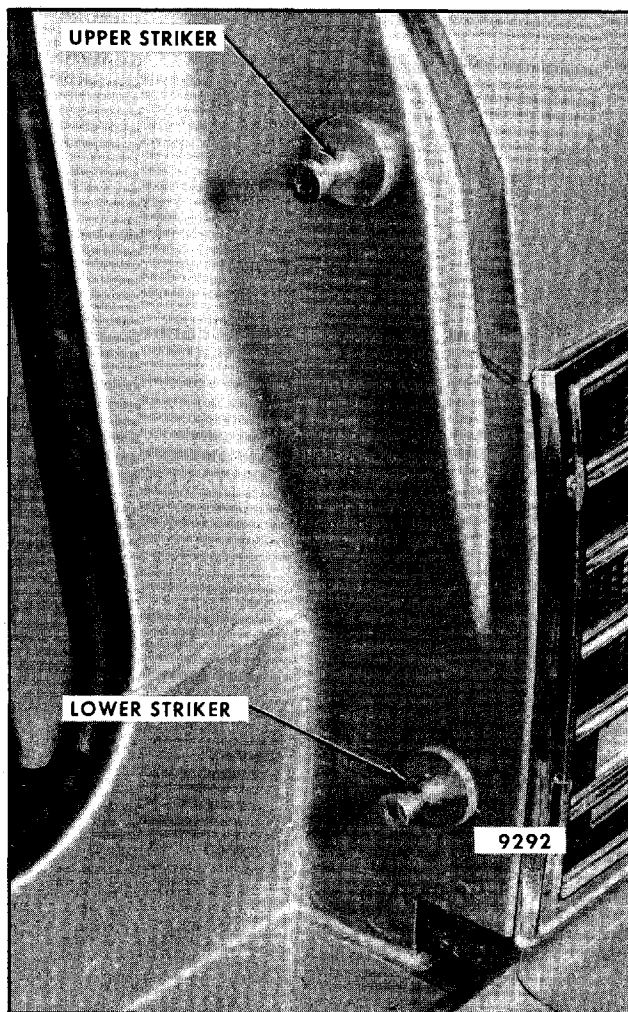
Tailgate Upper and Lower Striker Assemblies
